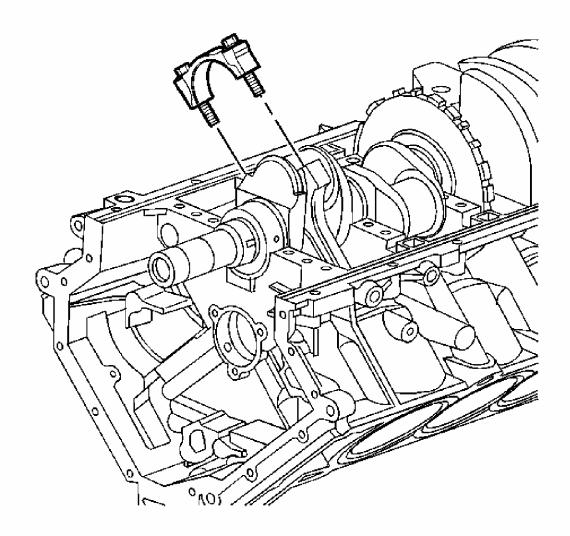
View Of Rod Cap & Bolts Courtesy of GENERAL MOTORS CORP.
